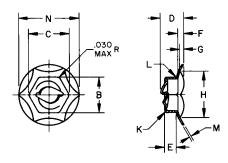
SELF-THREADING FACETED FLANGE TYPE STAMPED NUT
